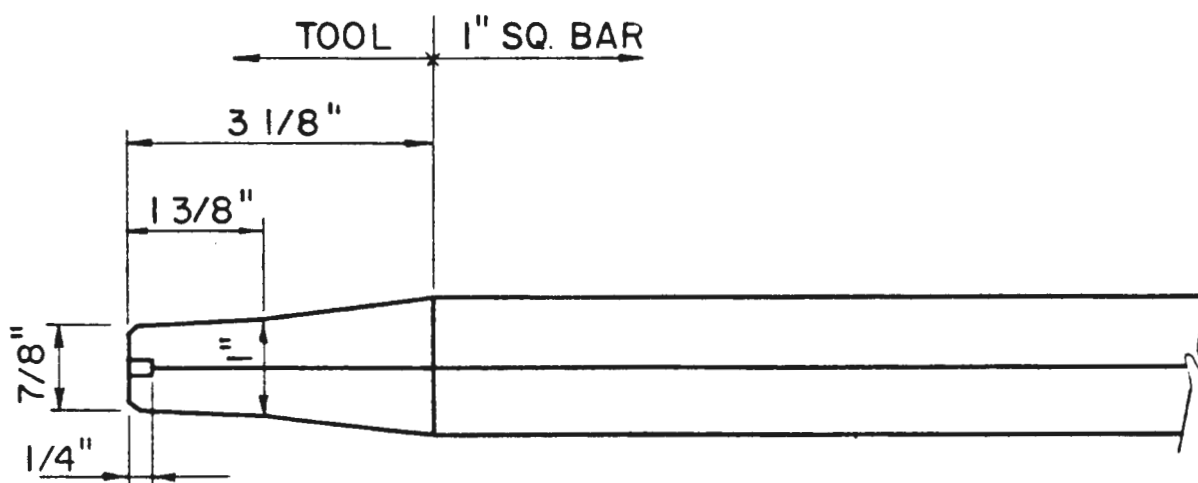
and 2 show a tool for accomplishing the scribbing mechanically. Photo 1 is an over-size bit ground on two sides so that the bit collar and two points will enter the previously drilled hole and remain centered in the hole (see also Figure 2). The other two points extend beyond the perimeter of the drilled hole and cut notches 1/4 inch deep into the opposite walls. The bit was attached to a four-sided section of drill steel as seen in Photo 2. The photo also shows a jig or template that prevents the drill steel from rotating as the tool moves down the hole. The template rides along the drill boom as the steel enters the hole.
